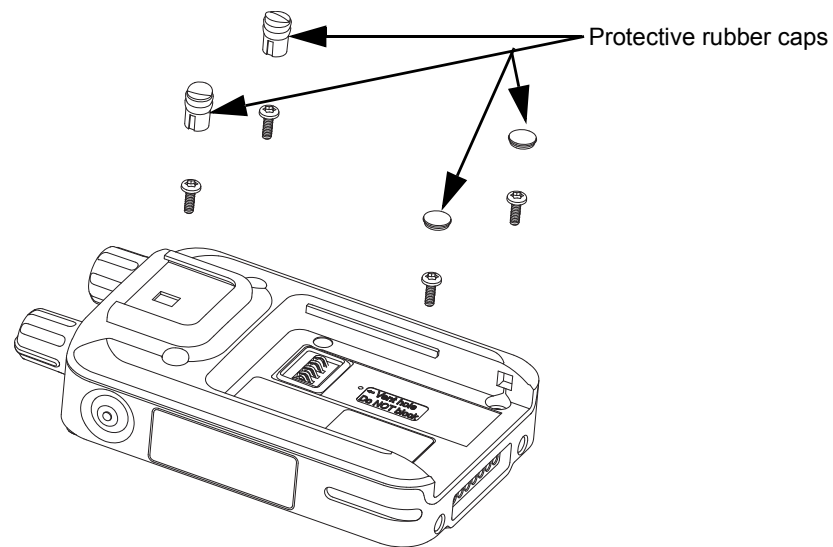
Removing Screws and Protective Rubber Caps from Back Housing
